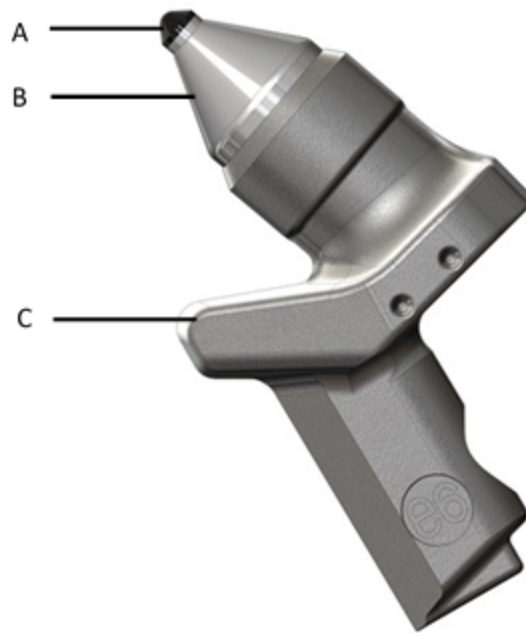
An Element Six road milling pick. A rounded PCD layer (A) has been sintered to a WC-Co base (B) which is brazed onto a steel holder (C).
